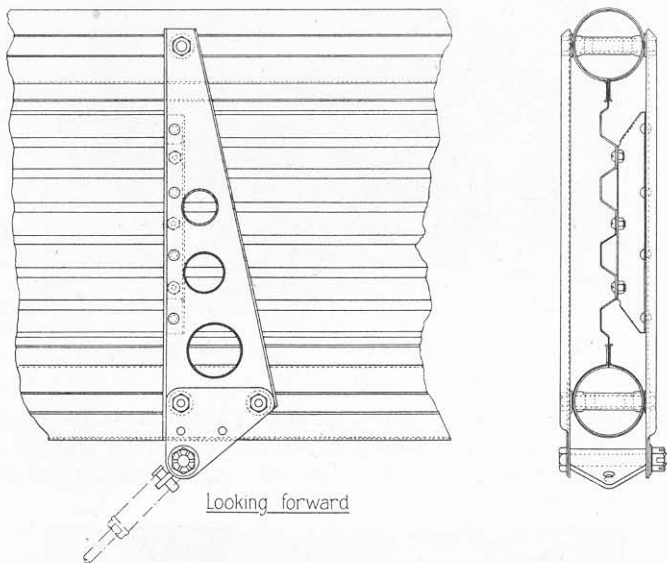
Wing tip float outer brace front spar attachment fitting (starboard).
